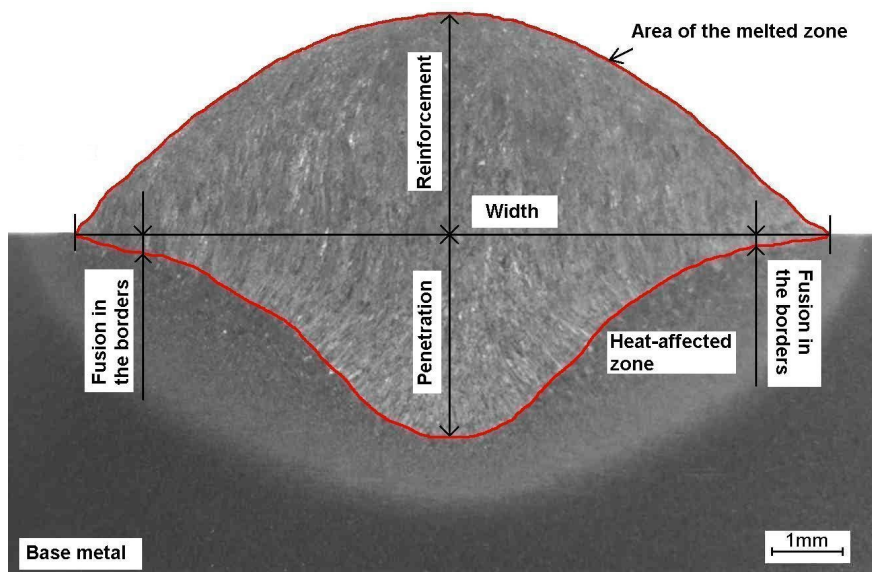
Traverse section of the weld bead using the mixture M1
